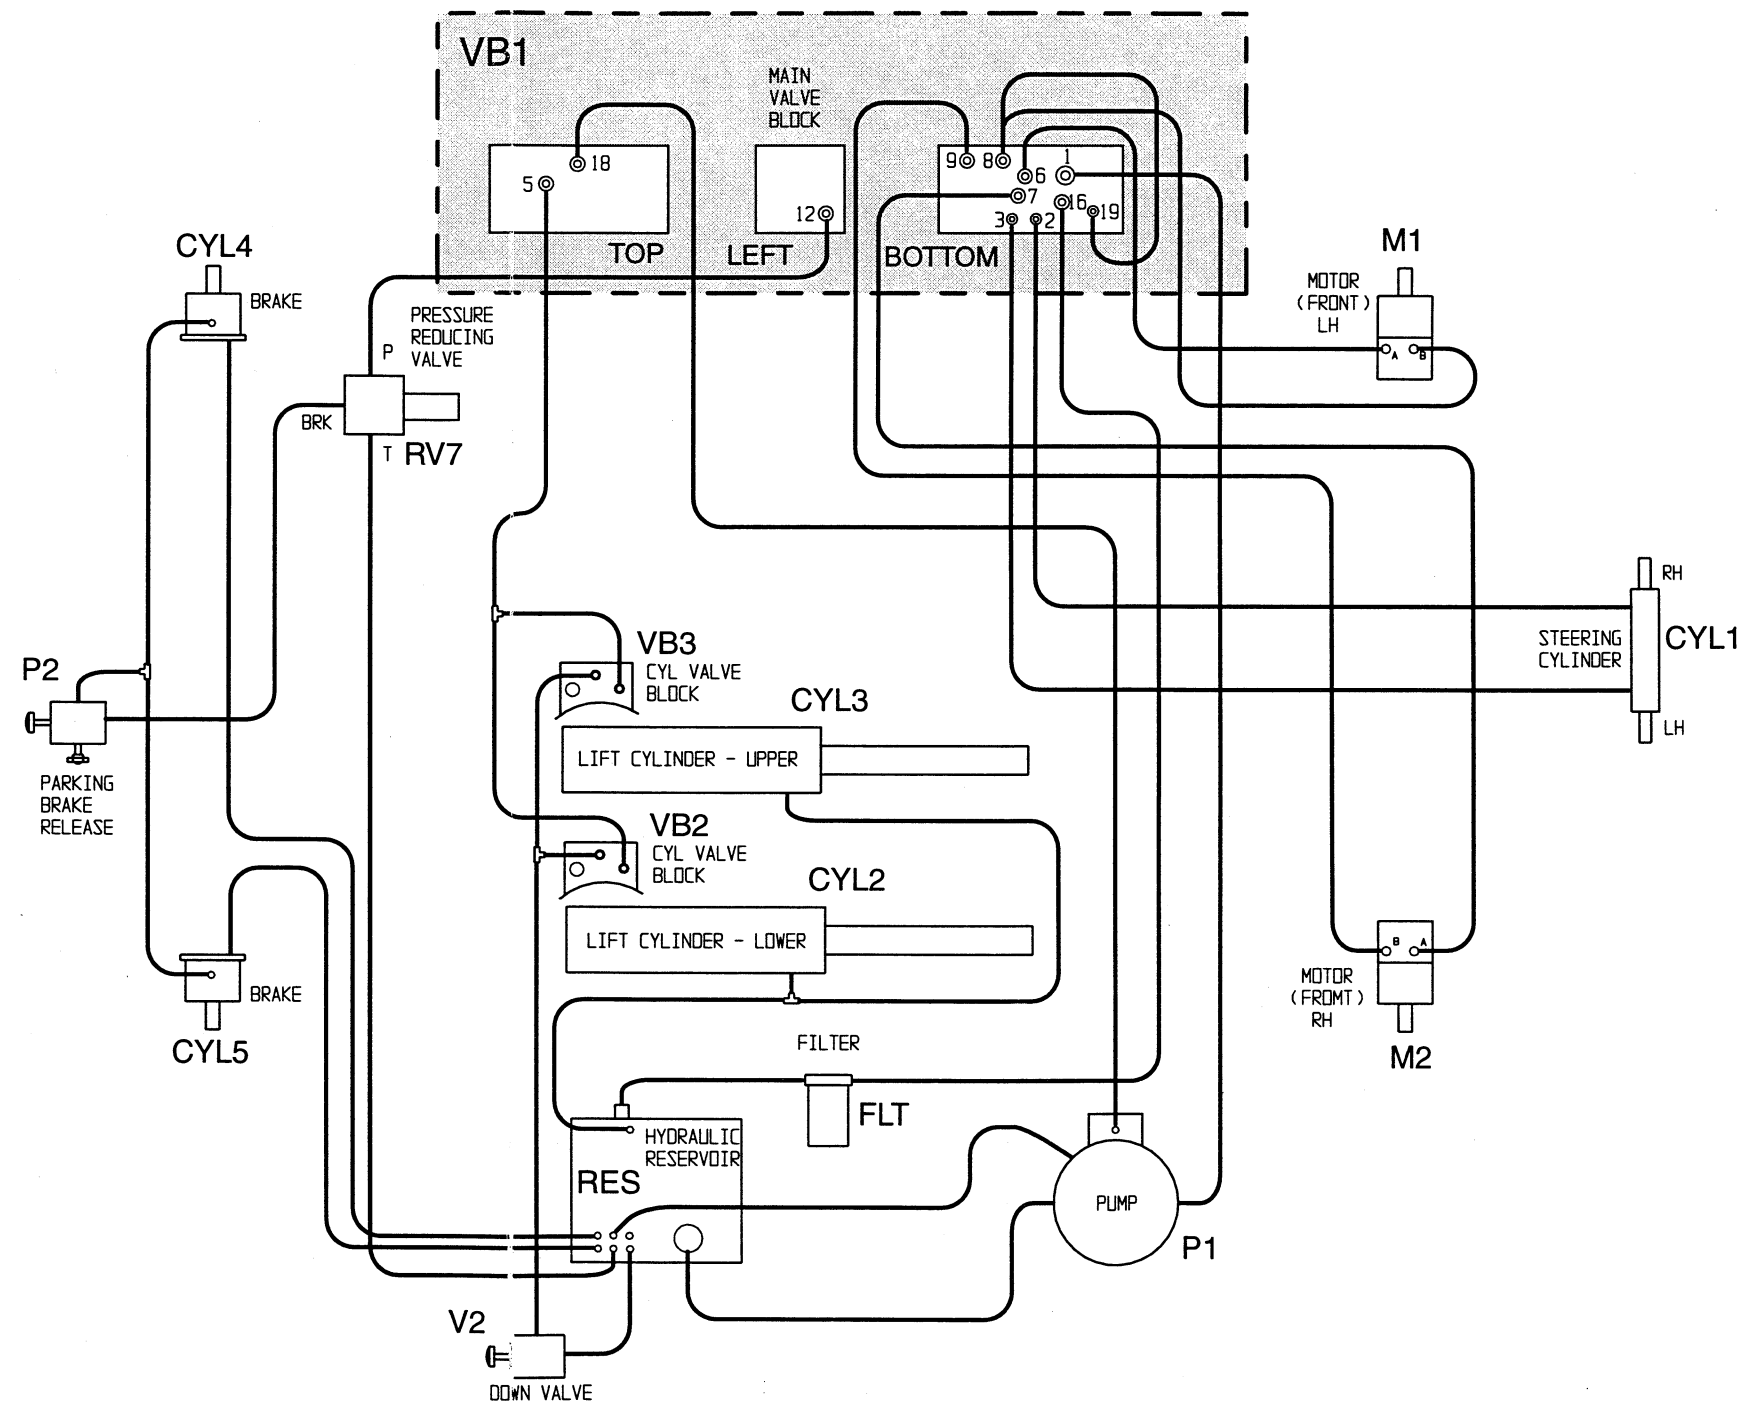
Hose Routing, XRT33 2-Wheel Drive
